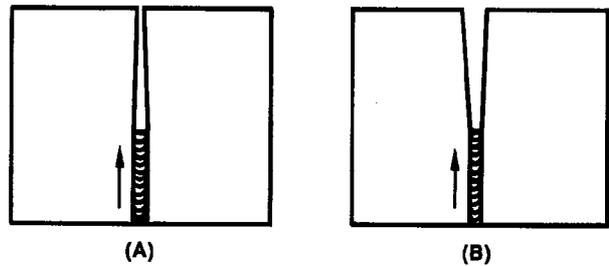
Angular Distortion Tendencies in Making Groove Welds
